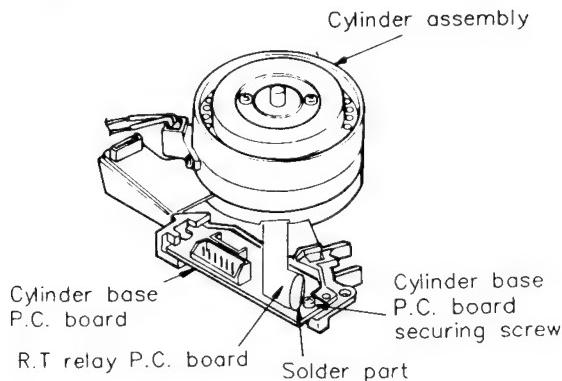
Relay P.C. board and cylinder base P.C. board
